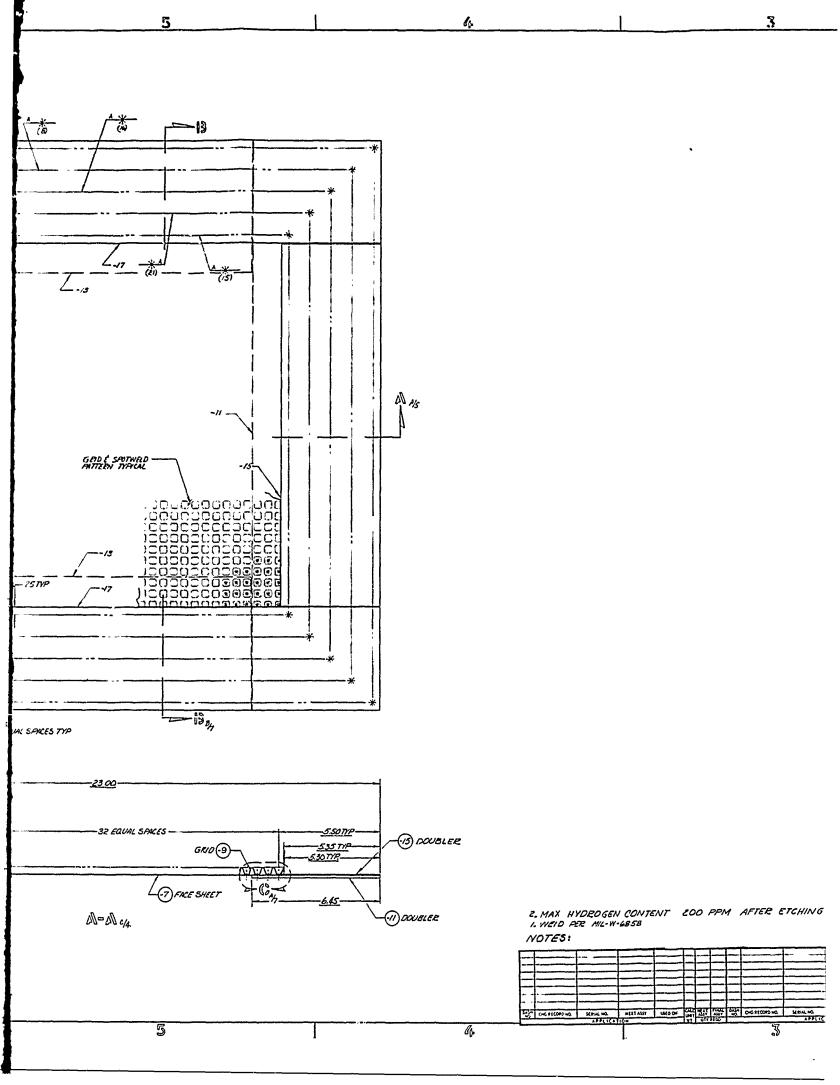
RIGIDIZED-GRID SHEAR TEST PANEL - Engineering Drawing 29-01013
